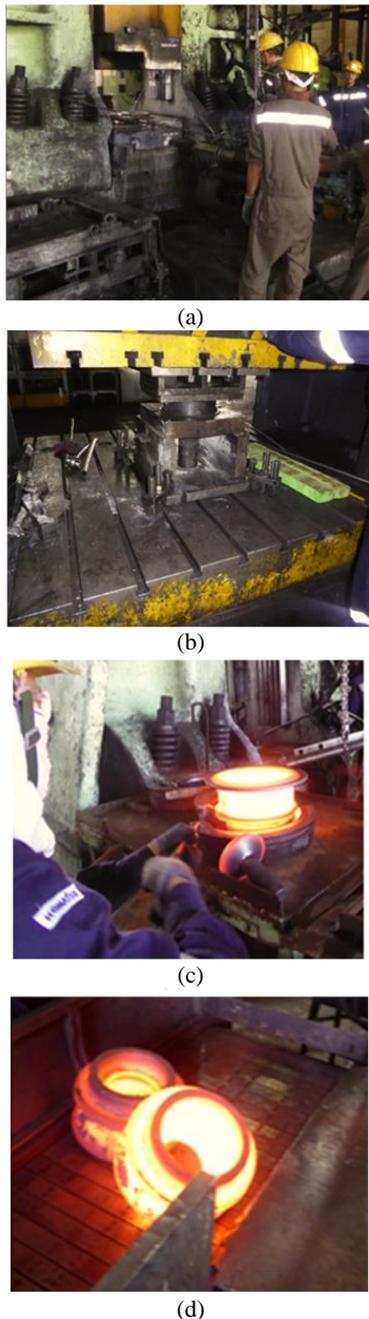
Experimental procedure: (a) die installation of the forging equipment, (b) trimmer jig installation on the trimming machine, (c) the undercarriage product, (d) and the undercarriage after trimming
